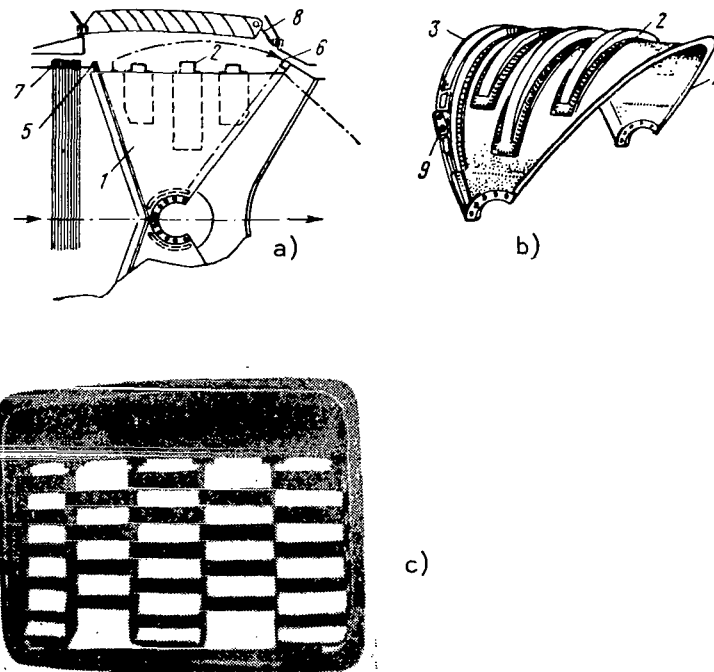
Reverser Used with Rolls'Royce Turbojet Engine and Bypass Engine. (a, Design Layout; b, Throttling Shutter; c, Deflecting Screen): 1, Throttling Shutter; 2, Rigidity Rib; 3, Front Gasket Shoulder; 4, Rear Gasket Shoulder; 5, Front Housing Semicircle; 6, Rear Housing Semicircle; 7, Elastic Reinforcement; 8, Maintenance Support; 9, Aperture.
